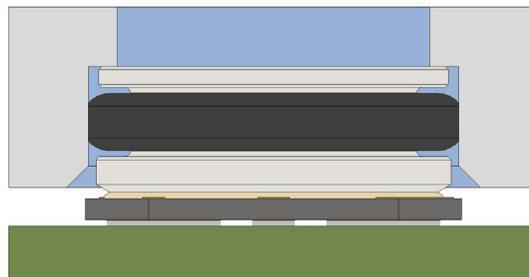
Sensor with O-ring Sealed in Mechanical Housing
